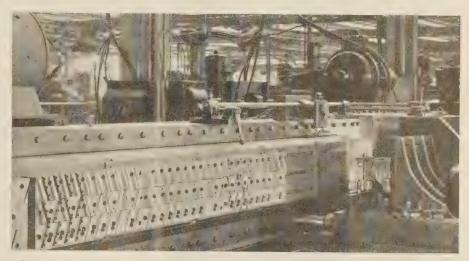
Large, Horizontal Broaching Machine for Finishing the Entire Top or Bottom Surface of Cylinder Blocks in One Pass of the Broach
